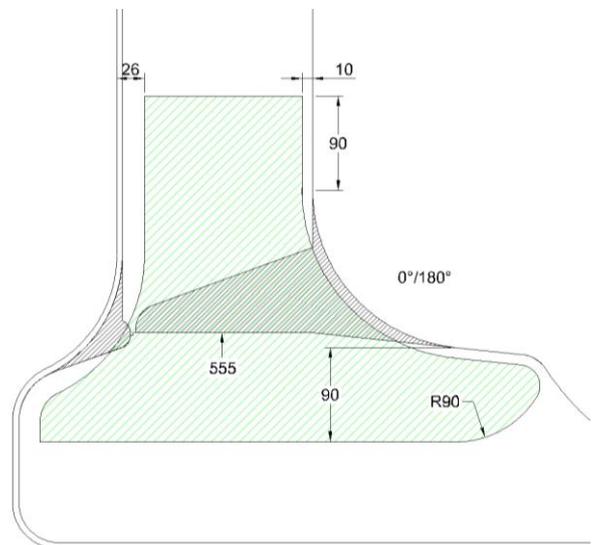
Inspection Volume for Inlet and Outlet Nozzle to Shell Welds
